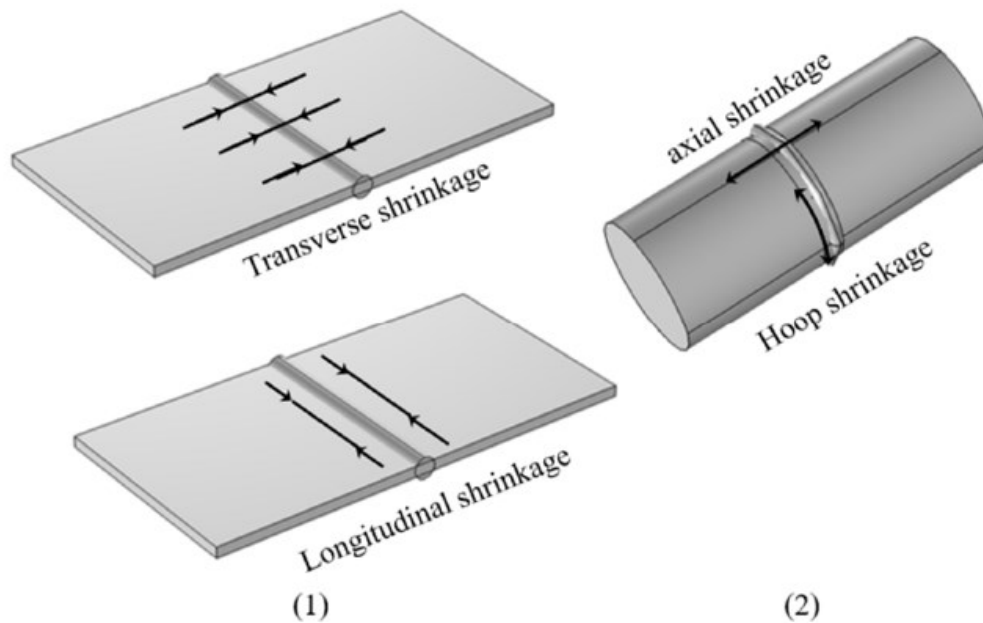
Elementary effects of welding for (1) welded plates (2) Welded cylinders [15] .
